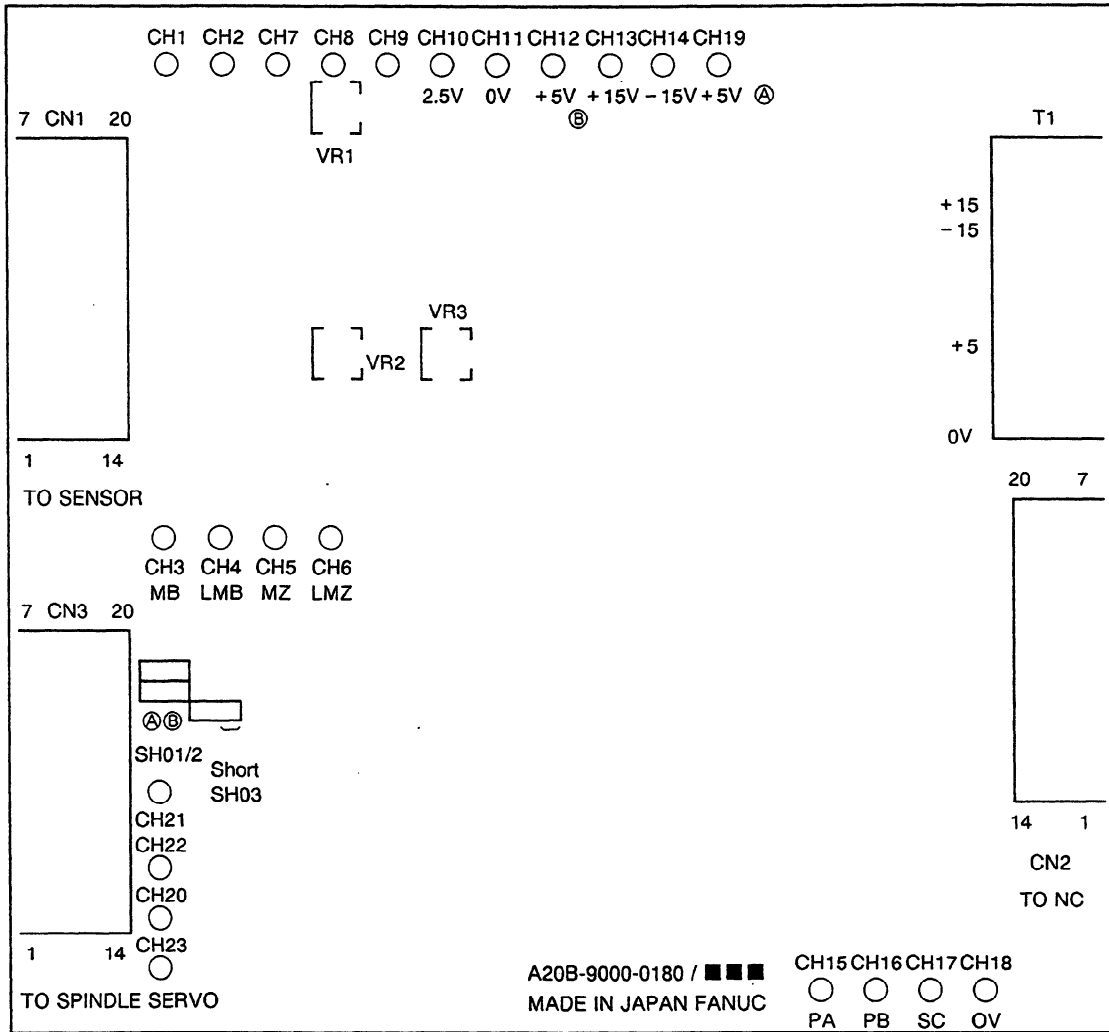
(a) Mounting Positions of Jumpers, Variable Resistors, and Test Points (PCB drawing No.: A20B-9000-0160)
